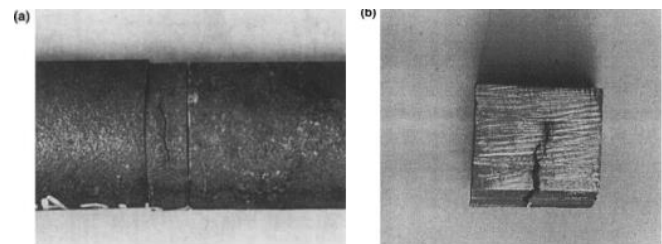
Circumferential crack at (a) outer surface; (b) inner surface [21].
